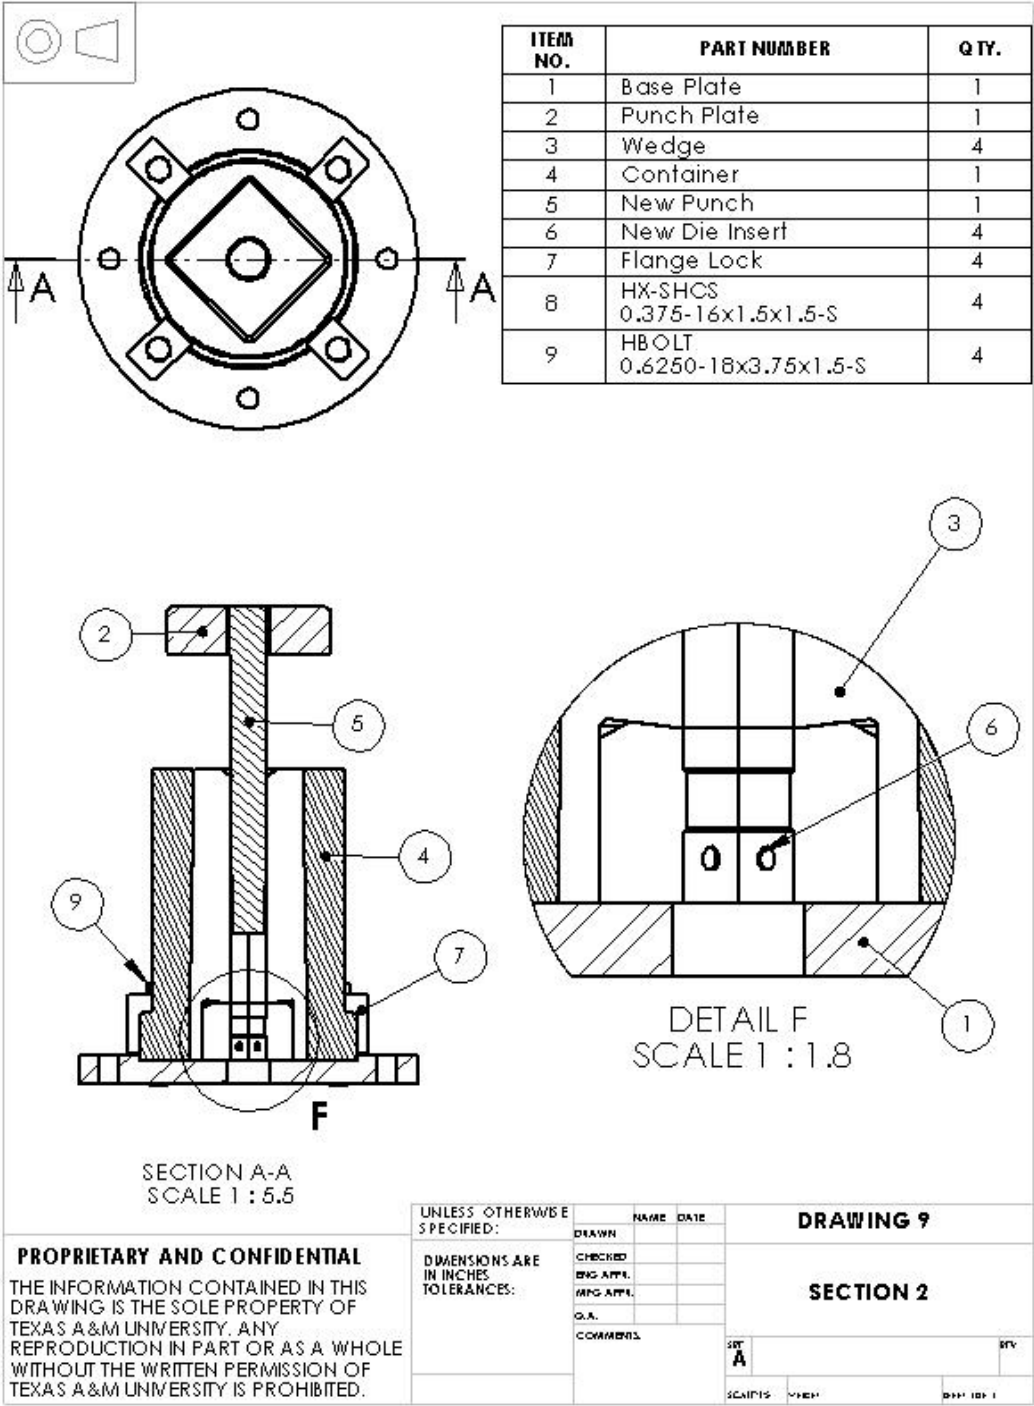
Section through area reduction extrusion tool showing details of the die insert sub-assembly
